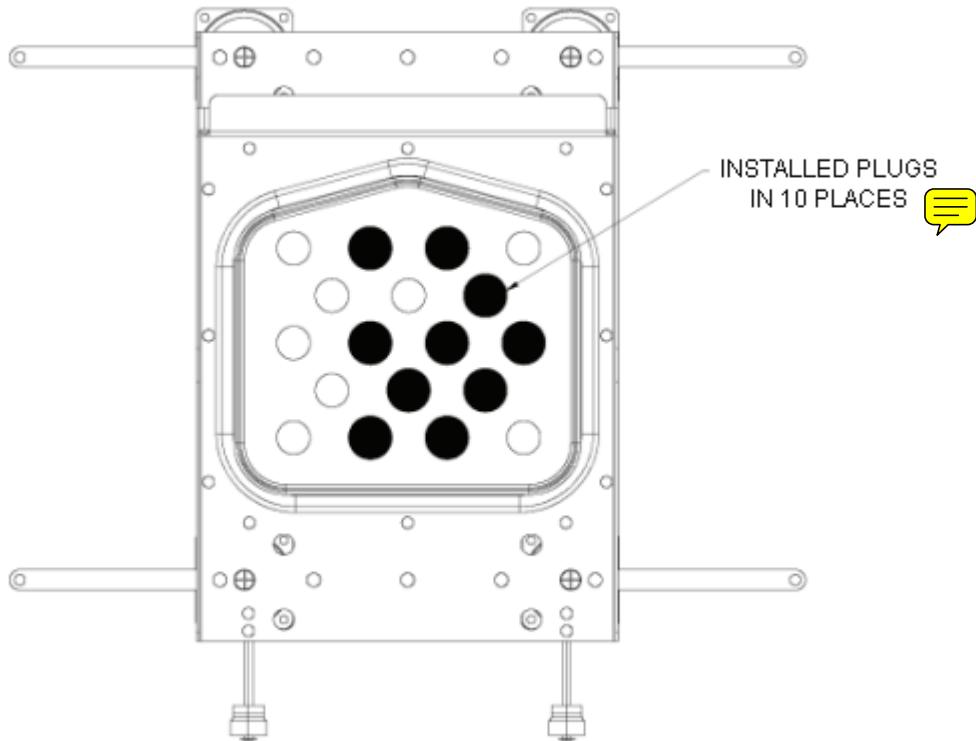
Fan Tray Plug Configuration (black = installed, white = removed)
